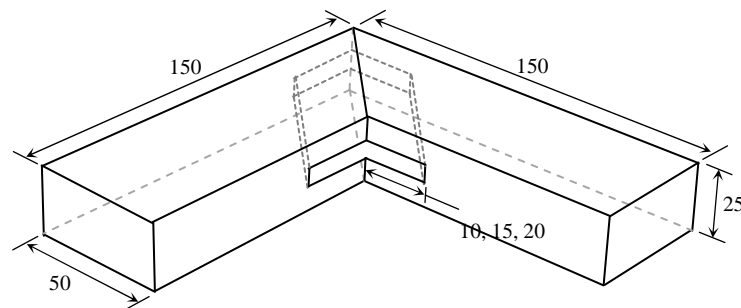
Geometry of joint specimens used in the study (measurements in mm).
